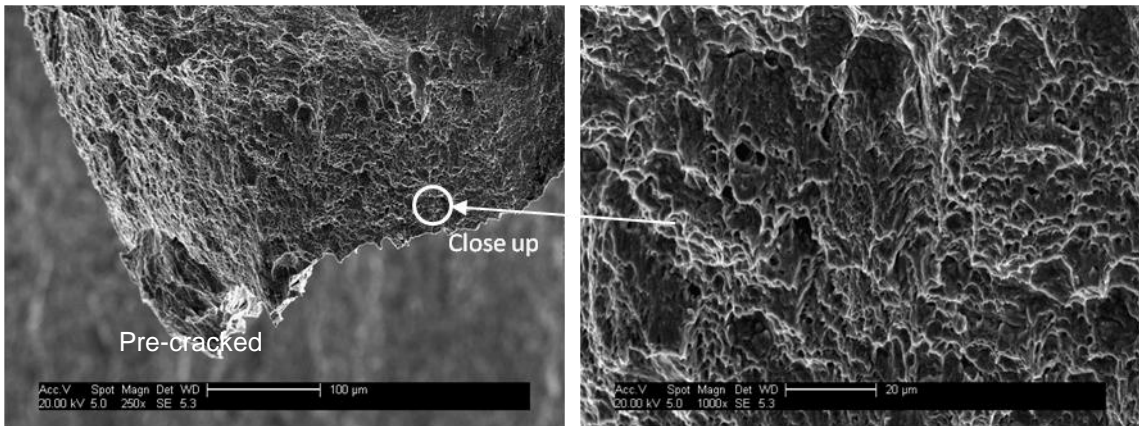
End of pre-crack and onset of fracture (at -70°C)
